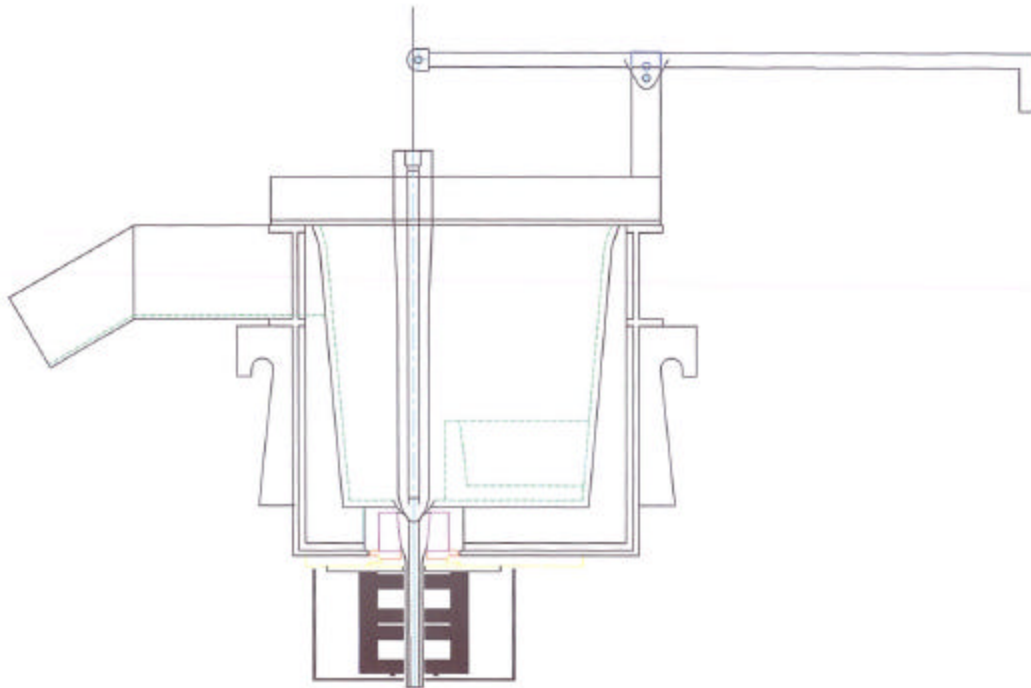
Schematic of Mag-Gate™ installed on bottom of test tundish including pour tube, well block, and stopper rod.
